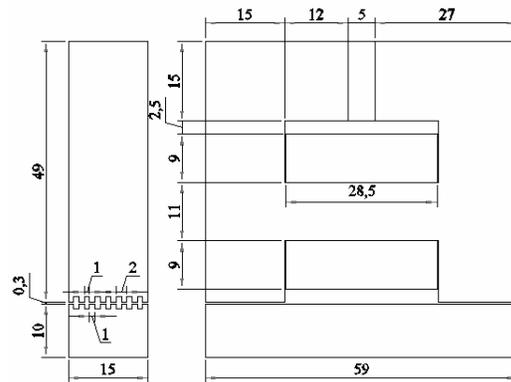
Main sizes of proposed linear TFM module (lateral and frontal view)
